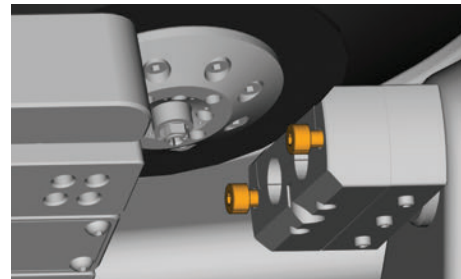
IMMOBILIZING THE ABUTMENT HOLDER
